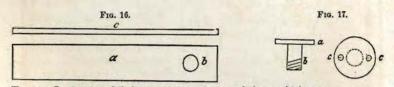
Leaf-spring, full size. a, blade; b, screw-hole; c, thickness.
